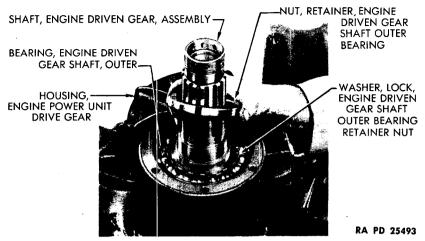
Installing Engine Driven Gear Shaft Outer Bearing Retainer Nut
